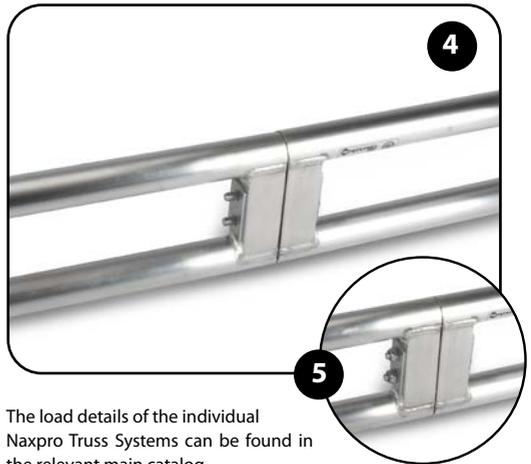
The connecting bolts are hammered in to the fixed point and secured against falling out with the R-Clip.
